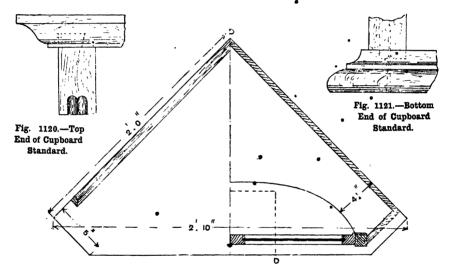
Horizontal Section through Hanging Corner Cupboard.
